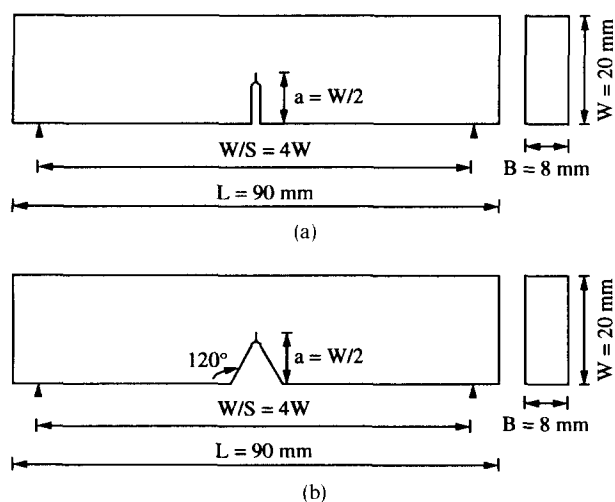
Geometry of injection moulded specimens: (a) without side groove; (b) with V-shaped side groove
